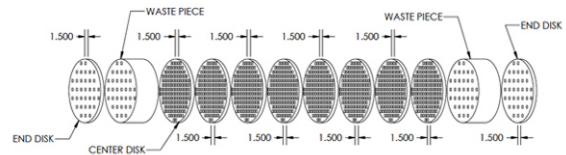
Exploded view showing biaxial disk specimen harvesting from a single DPF. Eight internal biaxial disks are yield per DPF. Two external biaxial disks are yielded for all DPFs.
